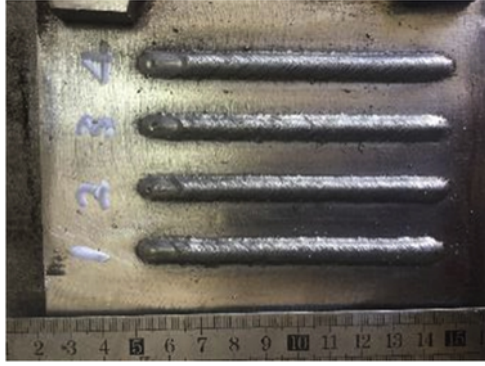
The single weld beads deposited using the predicted manufacturing parameters.
